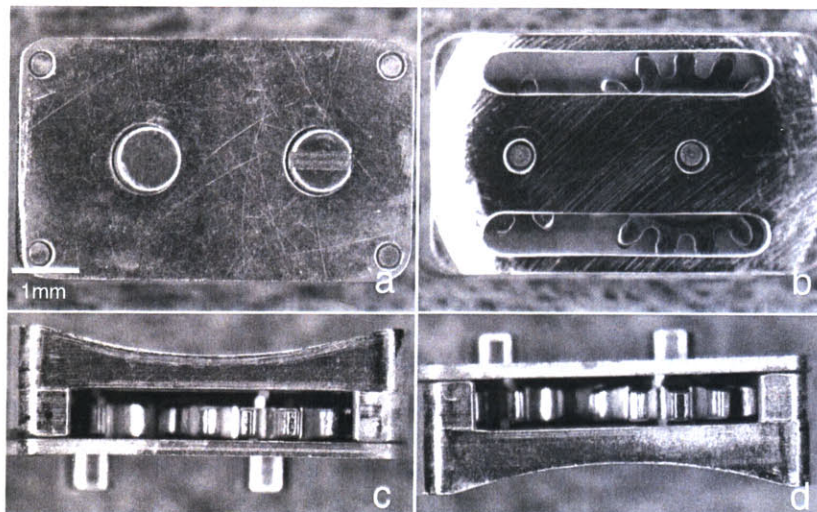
Pre-implantation photographs of a typical gearbox: (a) top, (b) bottom, (c,d) sides.
